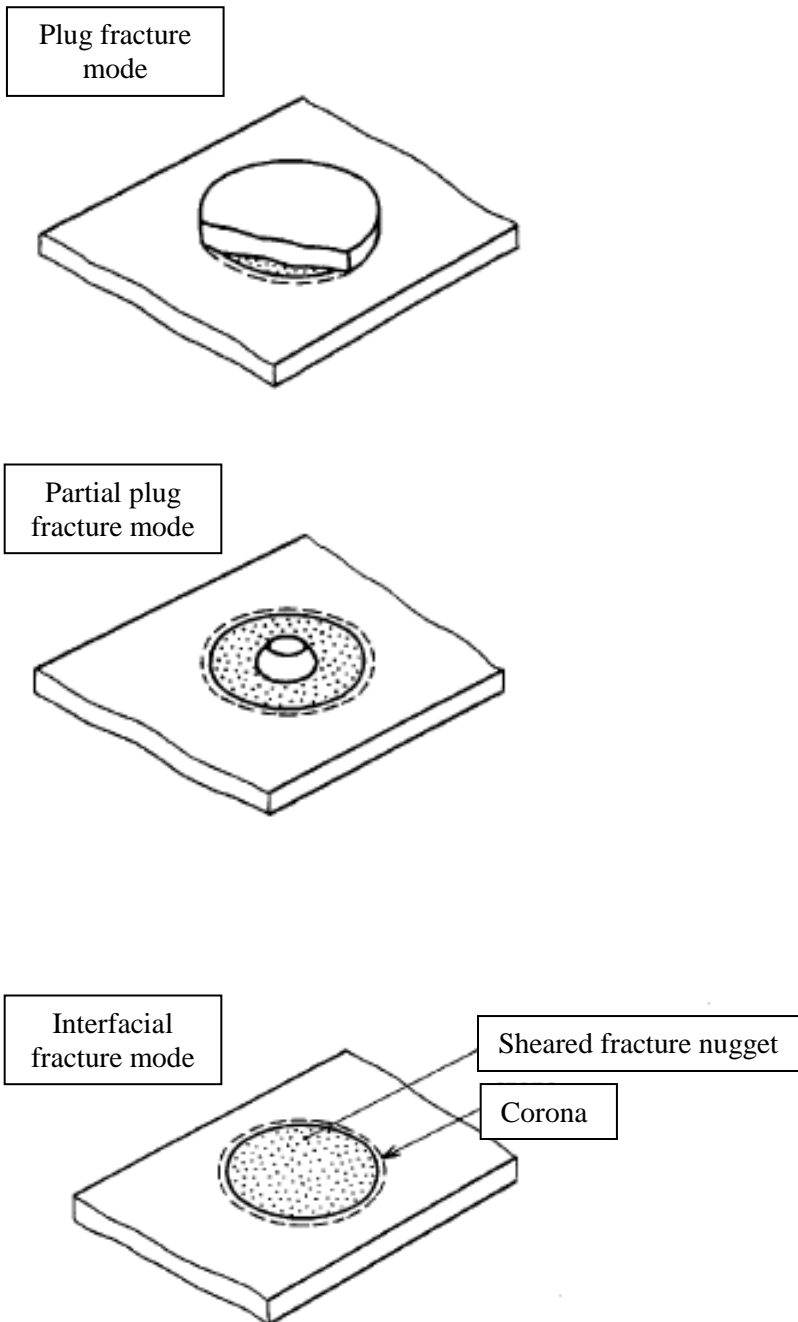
different weld fracture mode; plug fracture, partial plug fracture and interfacial fracture mode [53, 54]
